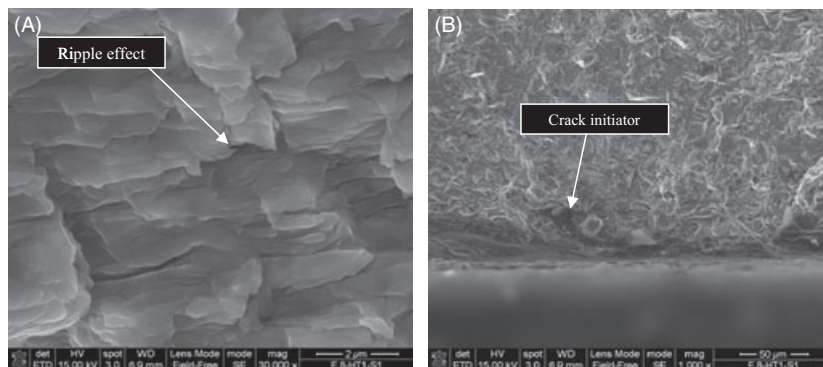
(A) HT1-Sample fractured surface at 133 MPa stress level fractures at 782 063 cycles-Rippling showing extensive fatigue. (B) Crack initiator close to surface edge
